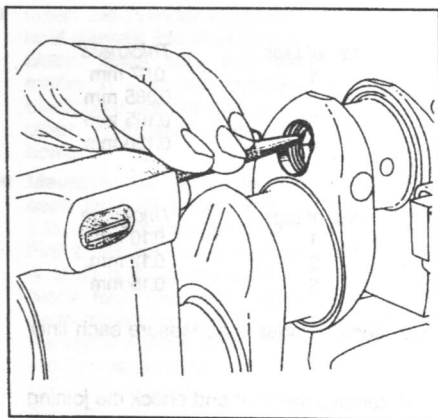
Oil gallery plugs are peened in position in the manner shown after they have been tightened to the specified torque.
